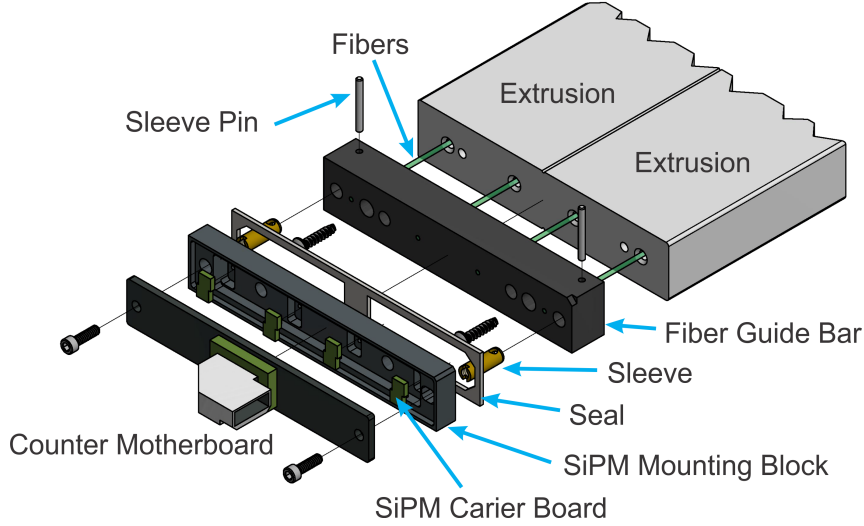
Exploded view of the readout manifold placed on both ends of a dicounter.
